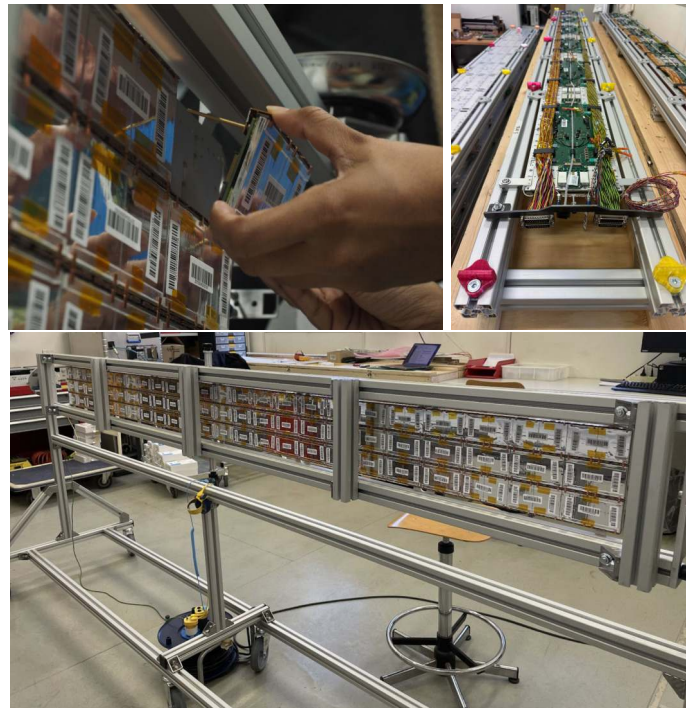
A photograph of a detector module being installed in the tray is shown on the top left, the completed installation with electronics and cables in place is shown on the top right, while the final assembly with all detector modules mounted on one side of the tray is shown in the bottom,
